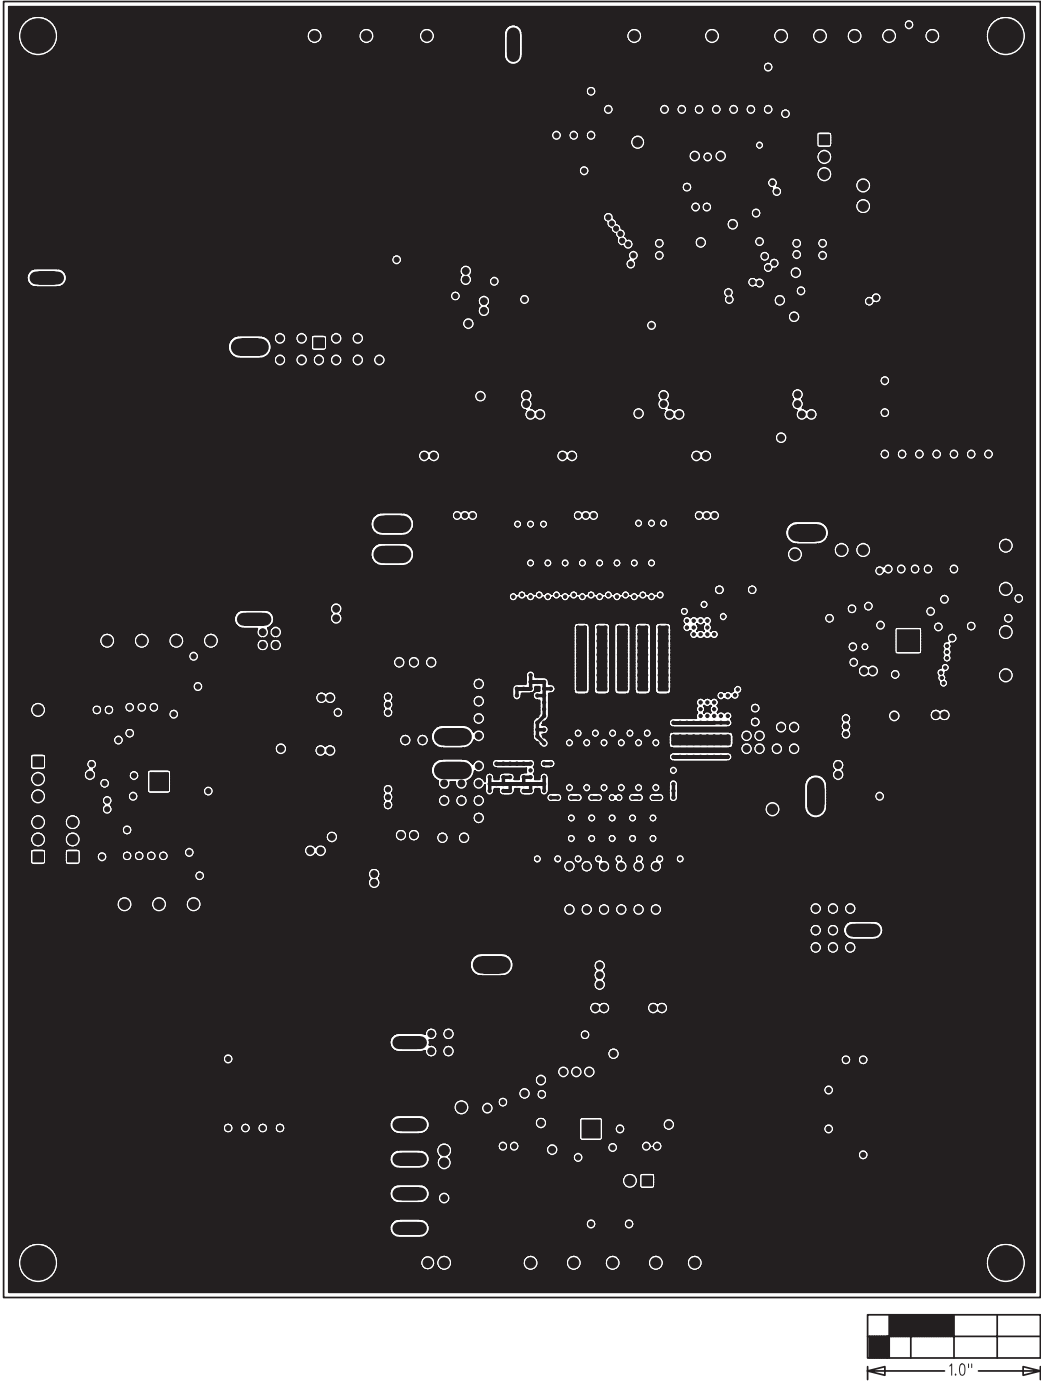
MAX17030 EV Kit PCB Layout—Internal Layer 2 (PGND Plane)
